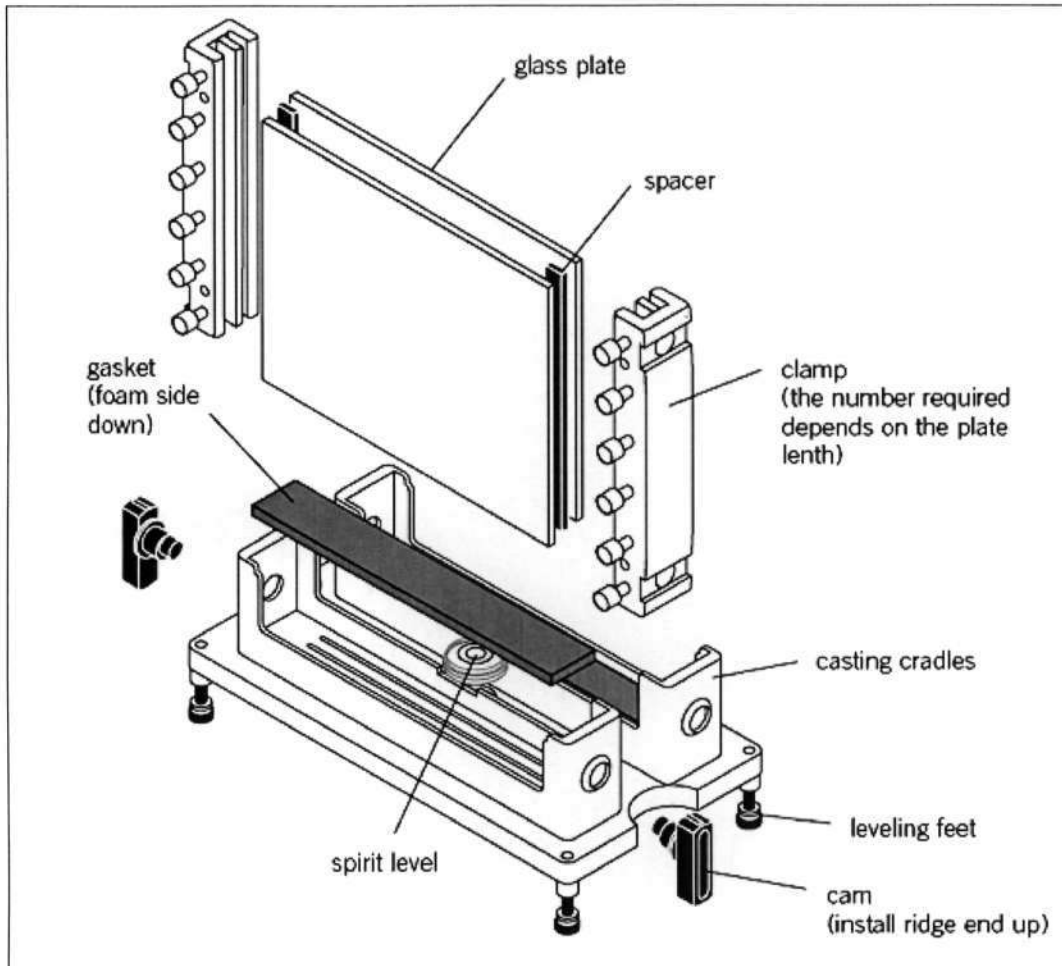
assembly of glass plates on caster (Hoefer SE 600/SE 660, SE600-IM/Rev. A0/06-04)
